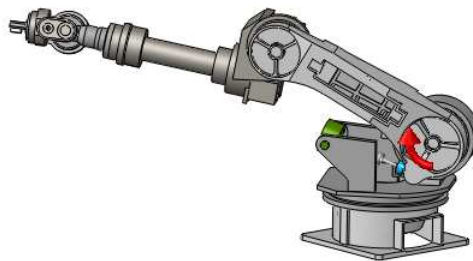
Posture of the spot welding robot at time 4.2s
